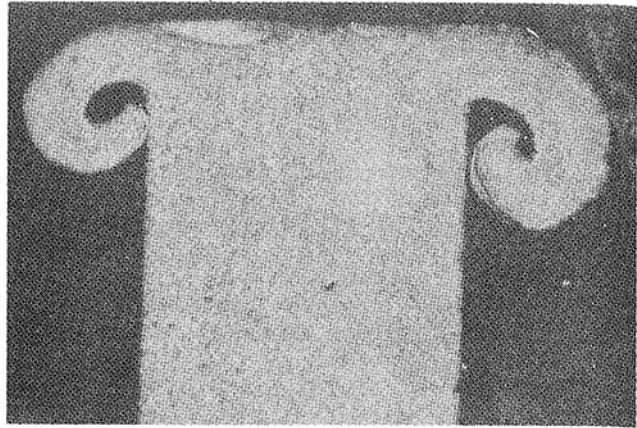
Cross section of a typical vane after rub with a plasma spray coated rotor
